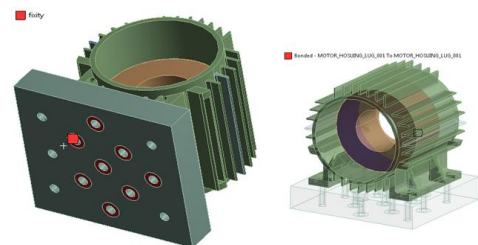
Defined Fixity condition for Vibration Fixture and Motor
